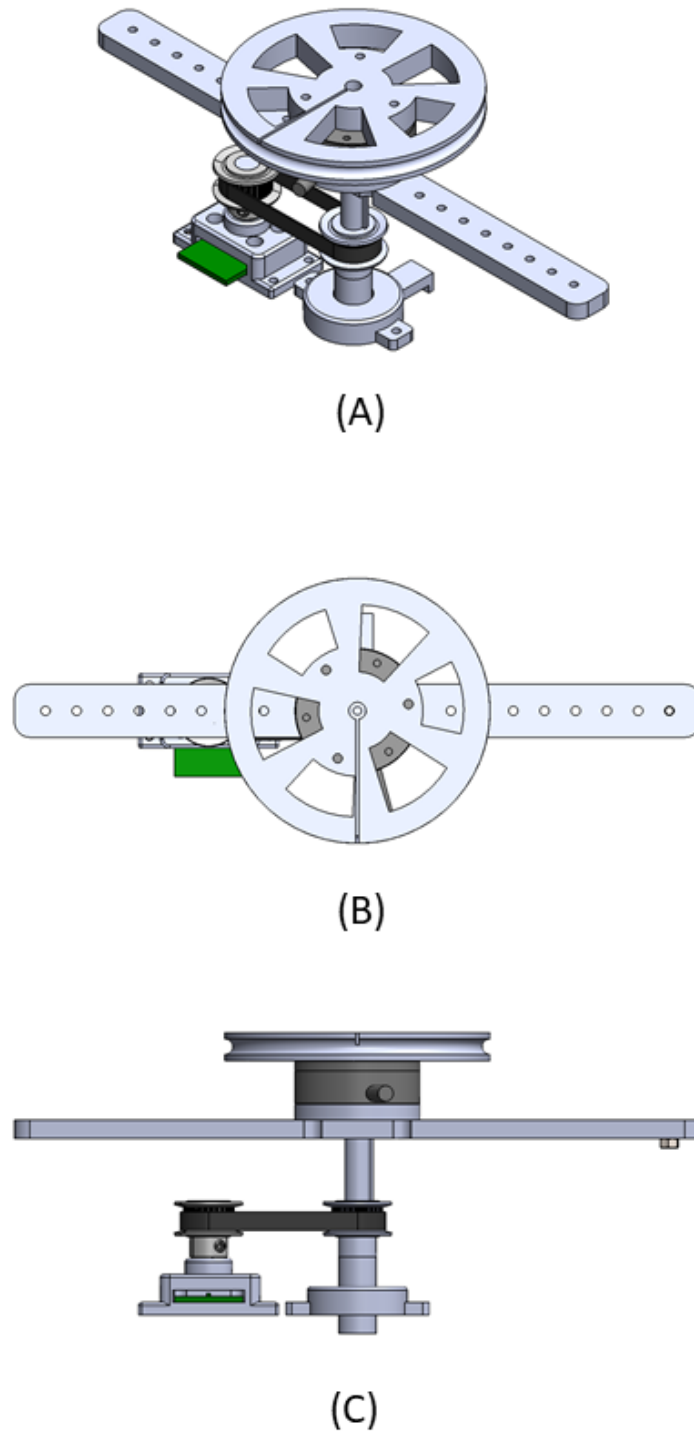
CAD of output in close-up showing in front view with 1:2 scale;(A) the isometric view, (B) top view and (C) front view
